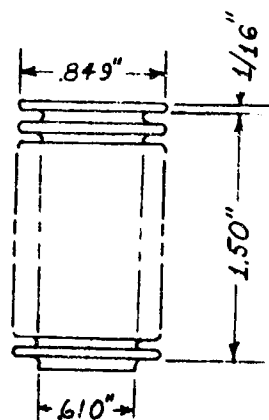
CROSS SECTION OF SPECIMEN CONTAINER
